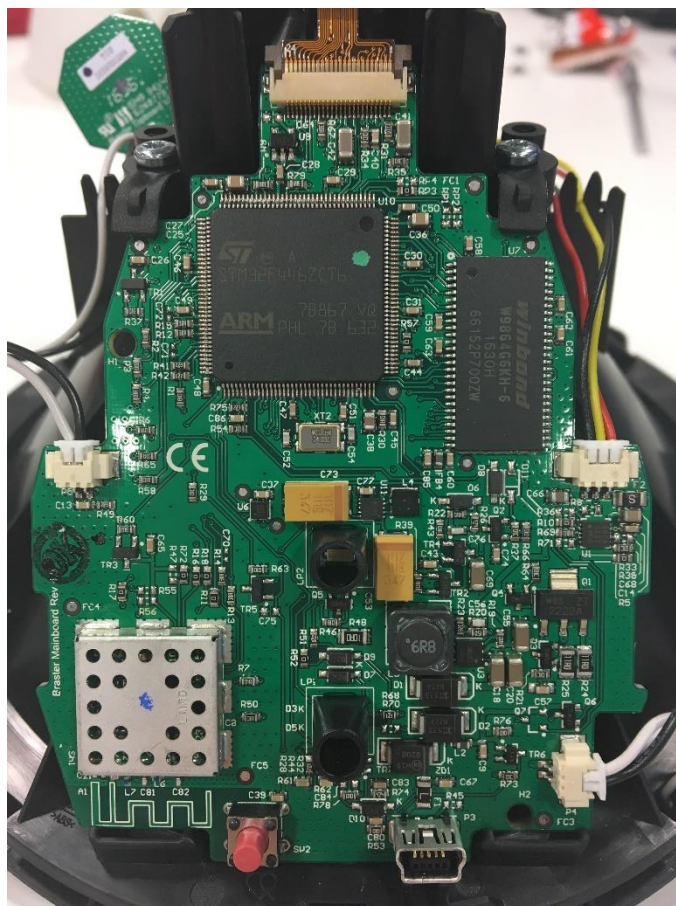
View of Main Board PCB fixed on the lighting chamber
